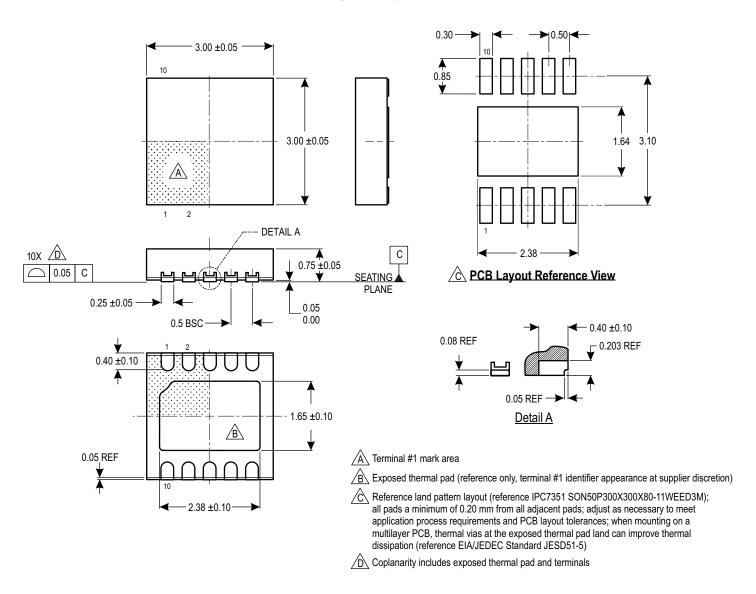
EJ Package, 10-Lead DFN with Exposed Pad and Wettable Flank
